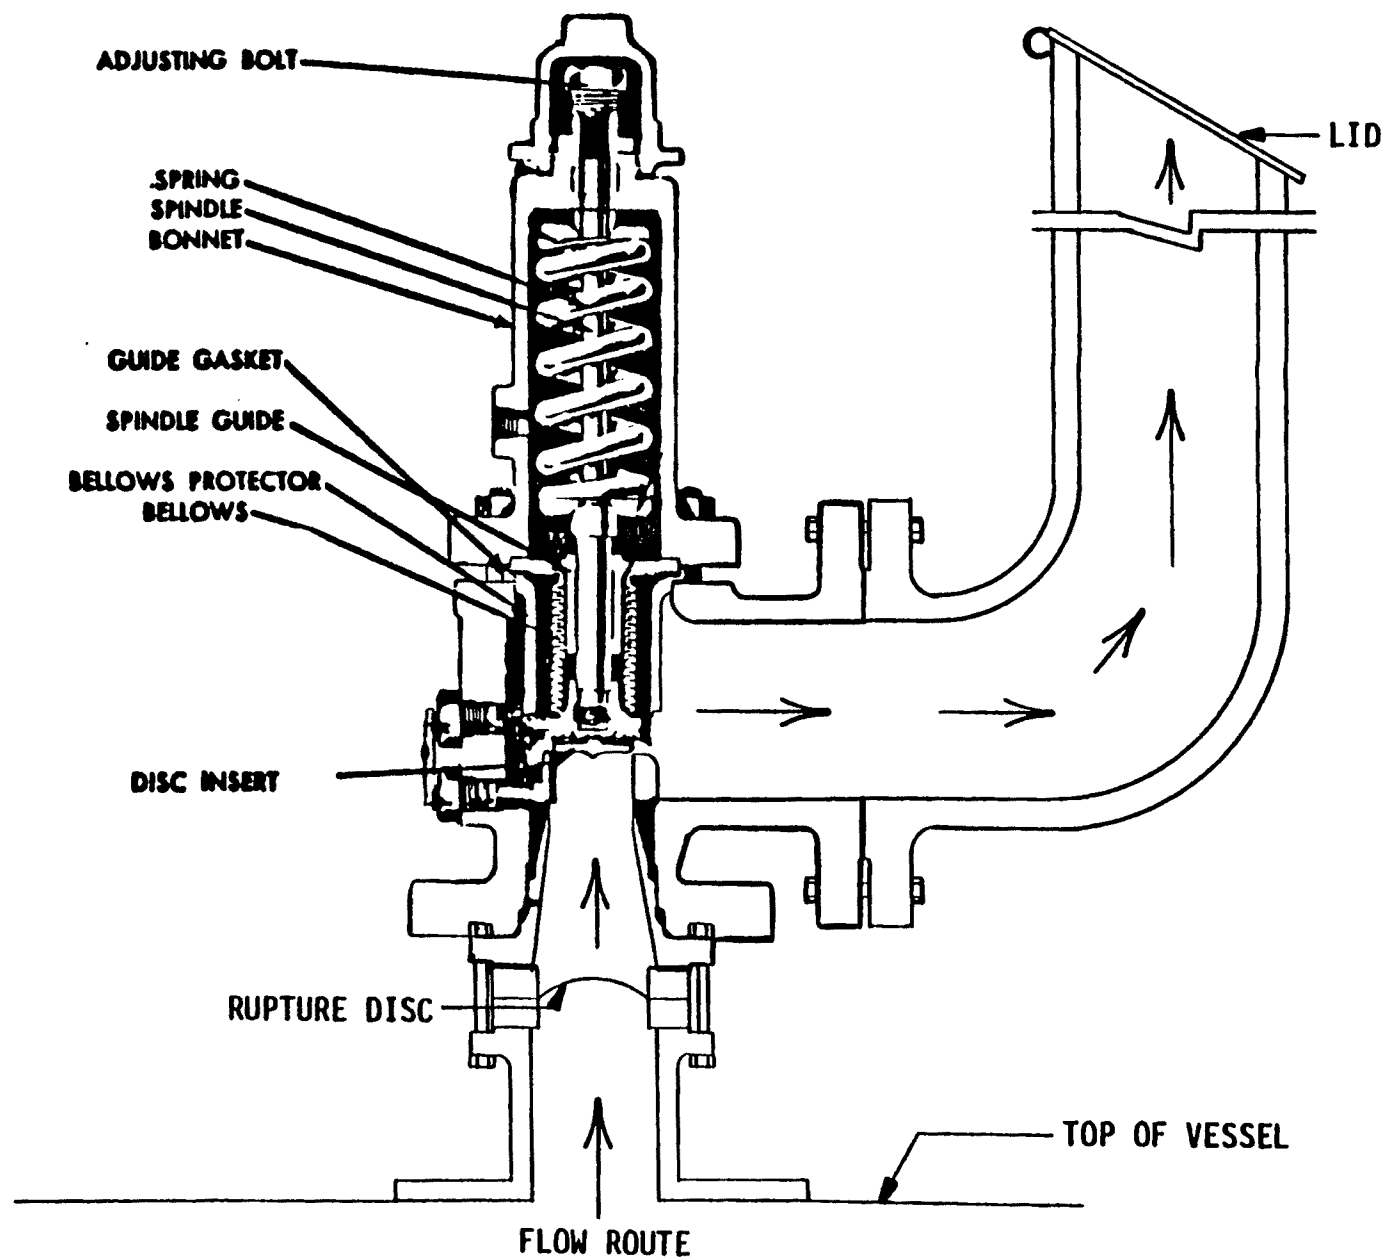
Rupture Disc/Safety Relief Valve Assembly
